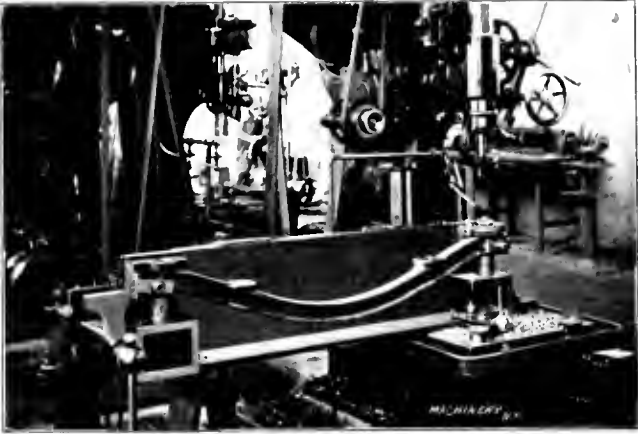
Drilling and Reaming Pin Holes in the Front Axle for the Steering Knuckles
